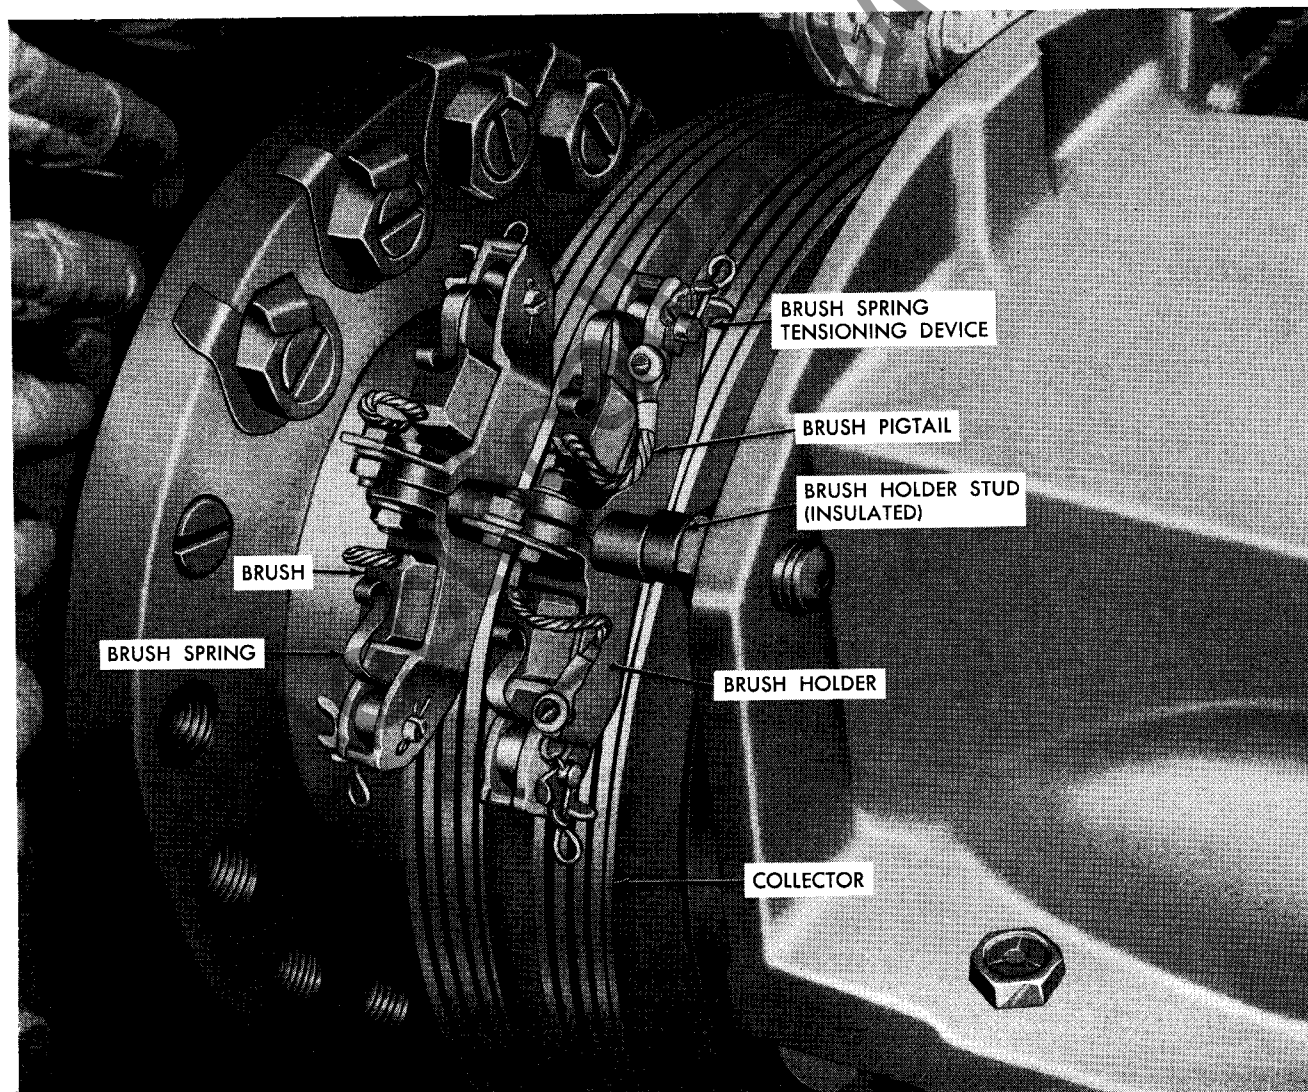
Collector and Brush Assemblies for F/A Synchronous Motor
